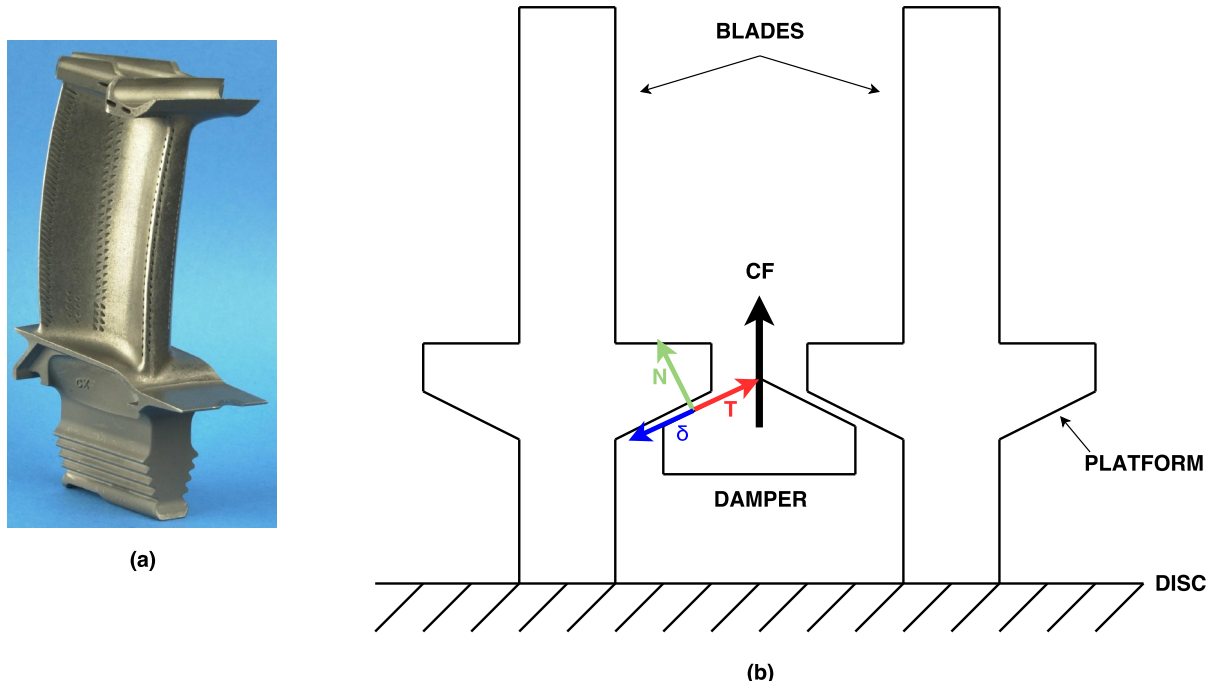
(a) Rolls-Royce HPT blade and (b) scheme of the blade-damper contact loadings
